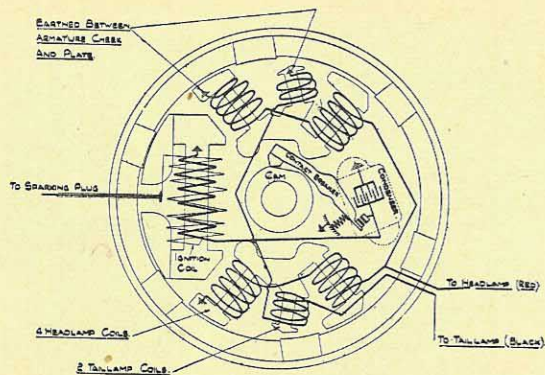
ARMATURE PLATE IGNITION AND LIGHTING WIRING DIAGRAM FOR SIX-POLE MAGNETO.
